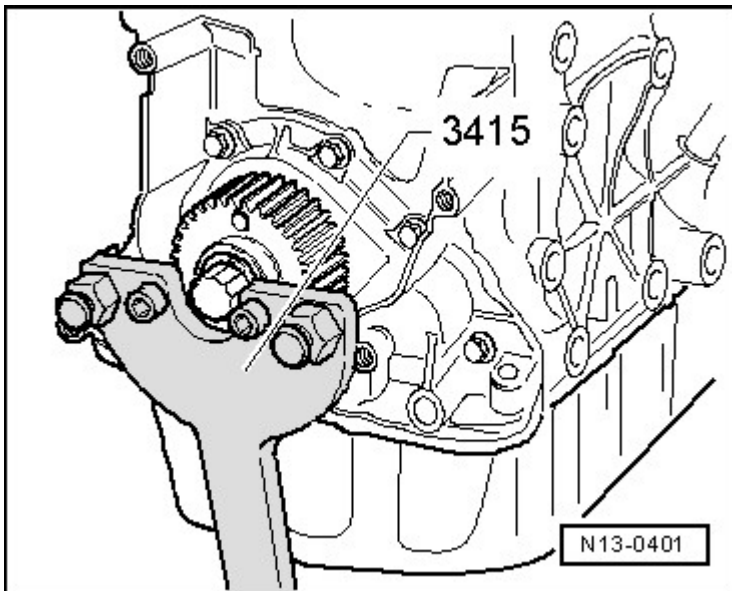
Counter-Holding Crankshaft Toothed Belt Sprocket With 3415
